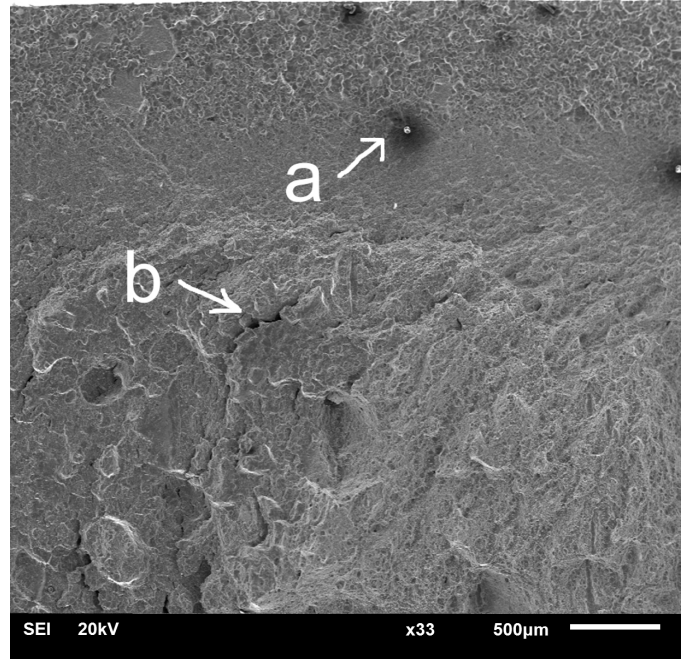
A SEM image of a fatigue fracture for 15CrNi6 steel following low pressure carburizing and oil quenching; a. inclusion under the hardened surface with: a. formed “pocket”, b. longitudinal cracks of the specimen
